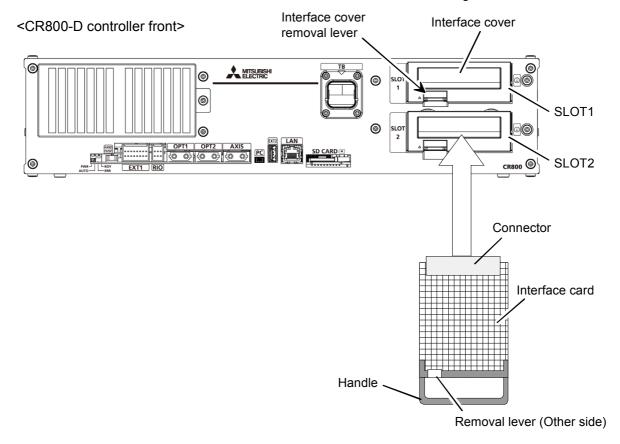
Mounting of the CC-Link interface card (CR800 controller)
